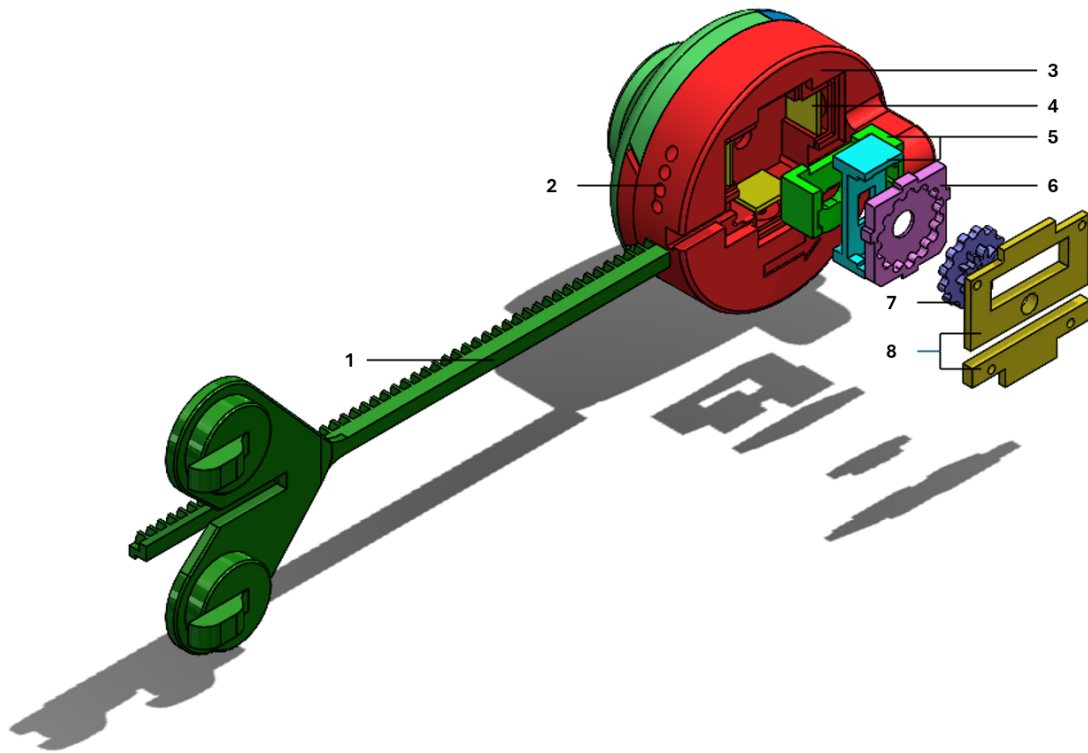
Exploded view of the motorized end-effector: 1. Needle driving rack, 2. pneumatic tubing inlets for driving the embedded M-45B motor, 3. Needle guide with embedded M-45B motor (V. Groenhuis, Enschede, Netherlands) housing, 4. Seals (4x), 5. Pistons (2x), 6. Hoop gear, 7. Cycloid gear with pinion, 8. Motor housing cover.
